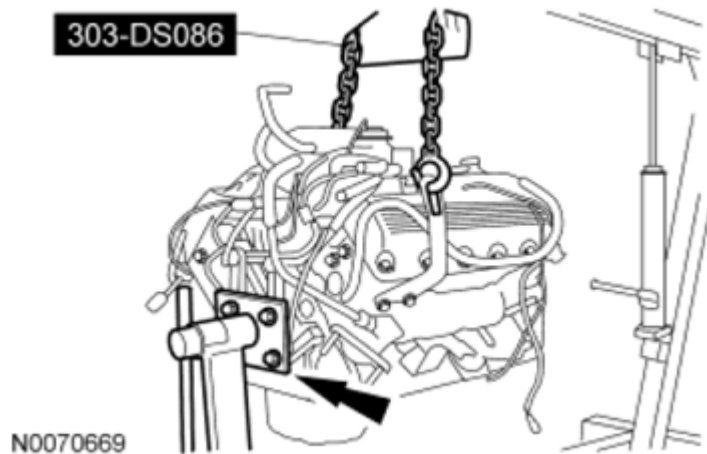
Identifying Engine Lifting Bracket Set (303-DS086)
